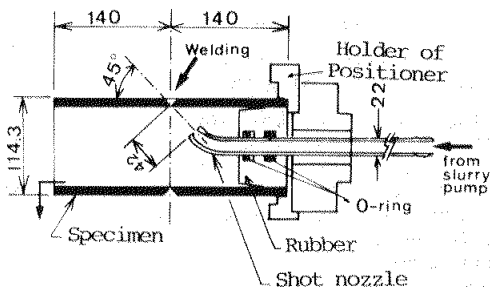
Equipment for Wet Shot Peening during 100 mm pipe welding
